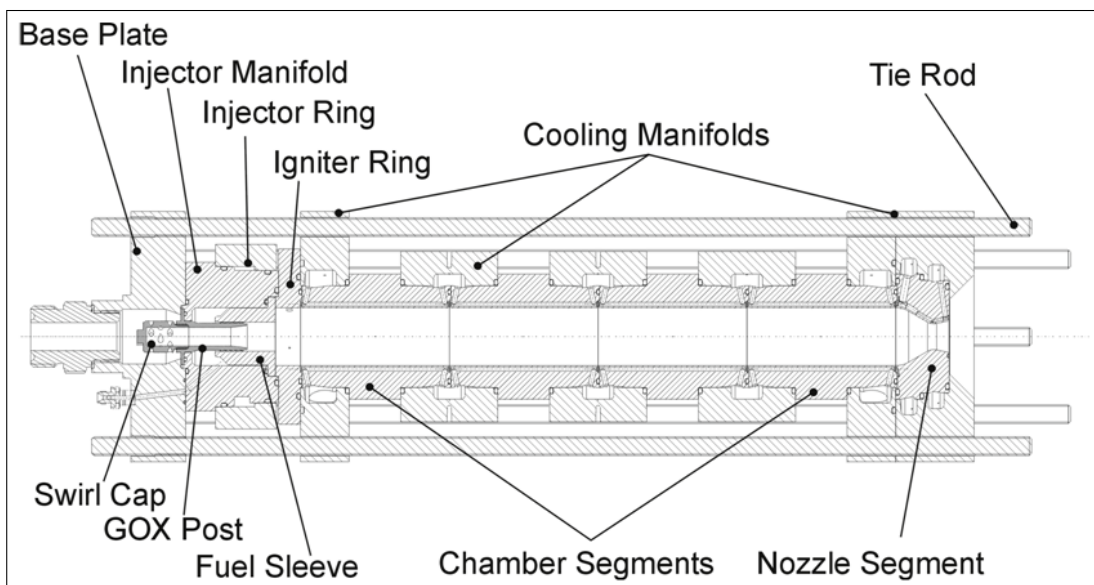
Sketch of 37 mm Combustion Chamber (reference design, 37 mm inner diameter,  $\varepsilon_c = 5.0$ )
